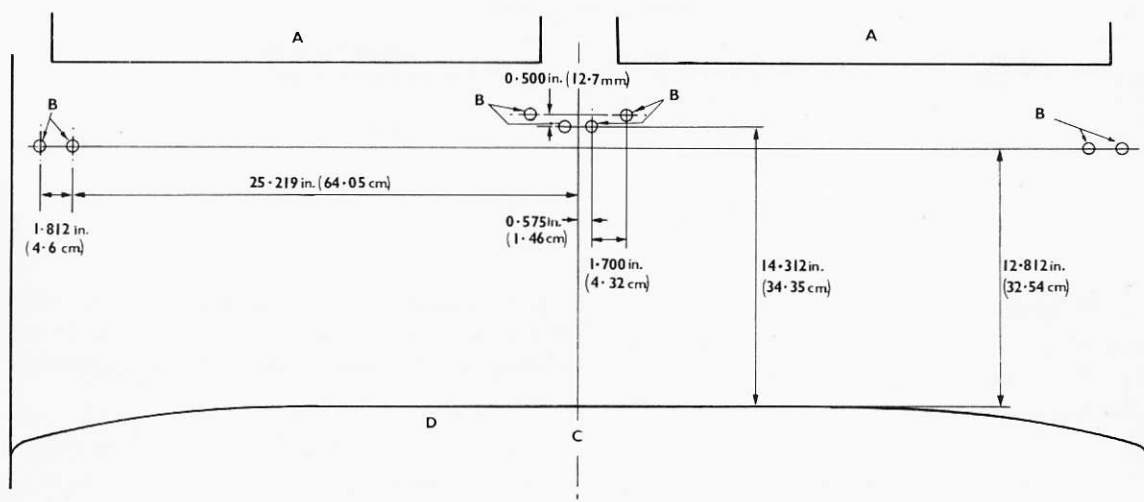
Dimensions for drilling holes for front seat shackles — standard S1 and S2 cars
